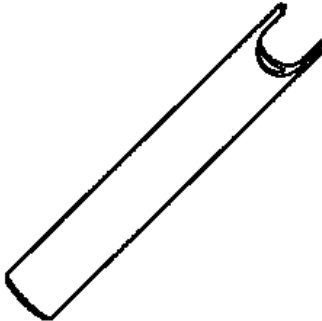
Front Differential Transfer Drive Gear Support - Torque Converter and Differential Housing Side
